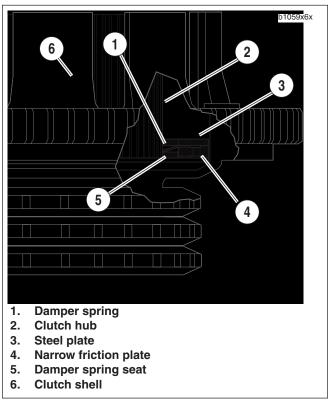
Clutch Pack Stack-Up (Cut-Away View)
